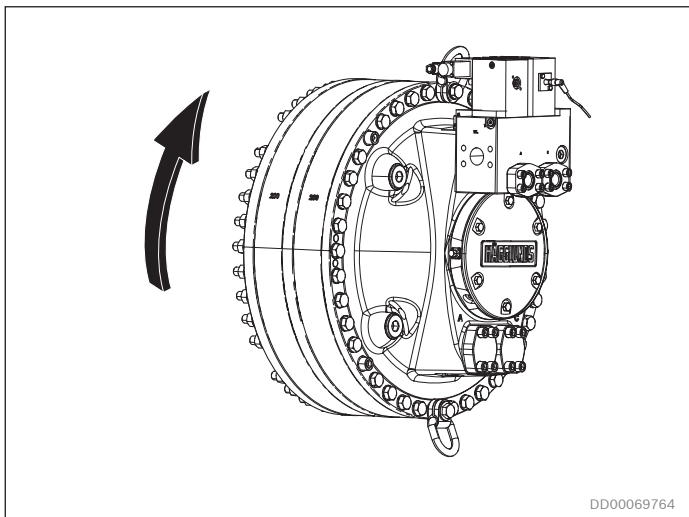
CB valve mounting position for counter clockwise drive shaft rotation as viewed from motor shaft side. INL (A1) port on valve connected to A port on motor
